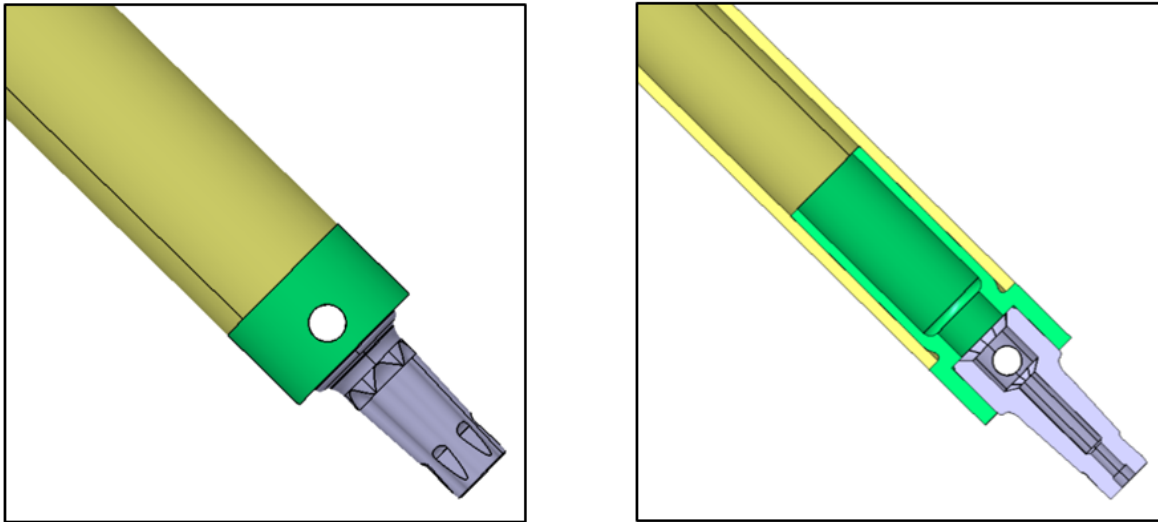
SC19 Side (left) and sectional view (right) of existing steering column - Solution 3
